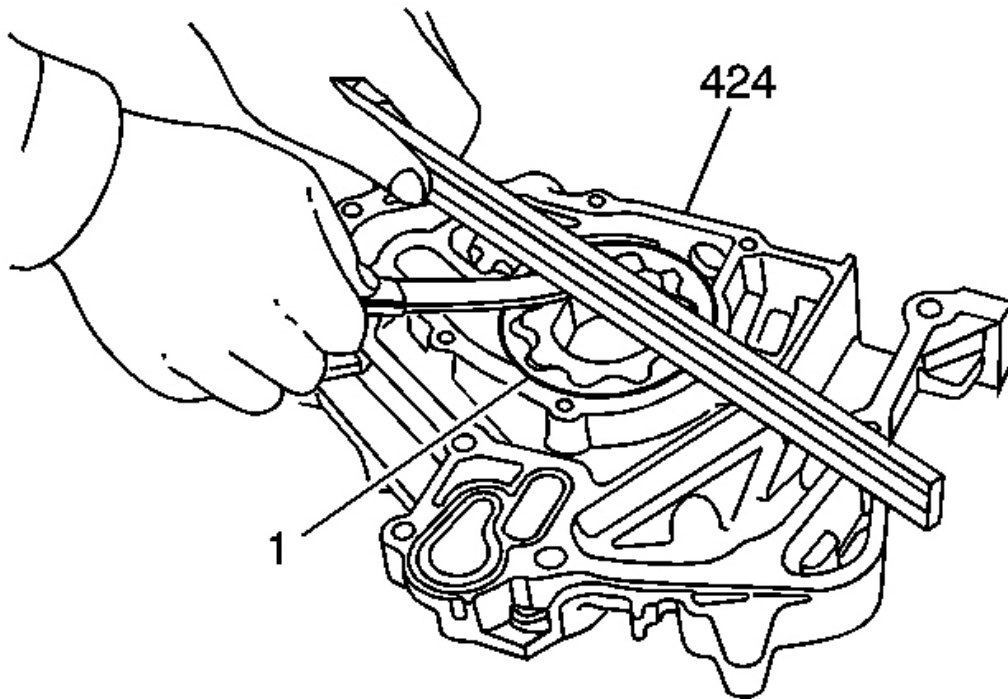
Measuring The Housing-To-Rotor Axial Clearance
